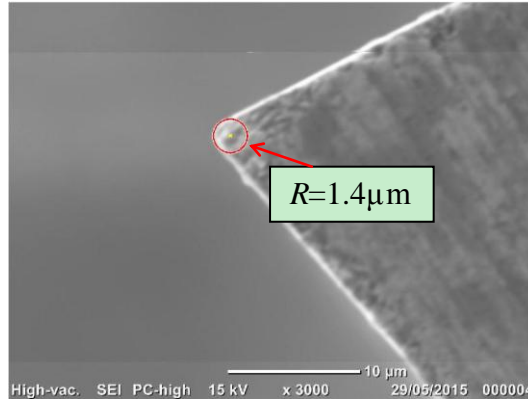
Cutting edge radius of the tungsten carbide tool
